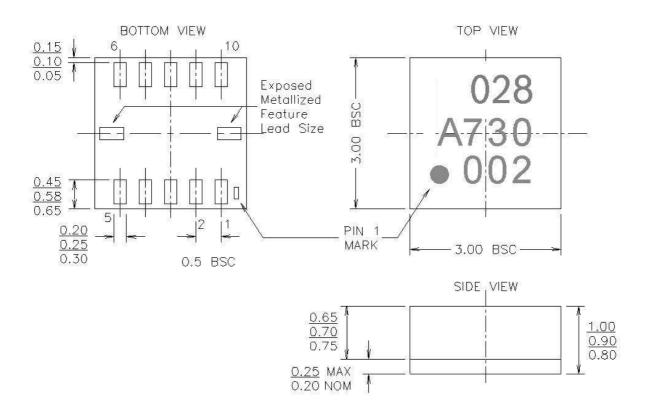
Top, bottom and side views of the 3mm x 3mm x 0.9mm LGA package outline drawing (dimensions in mm)
